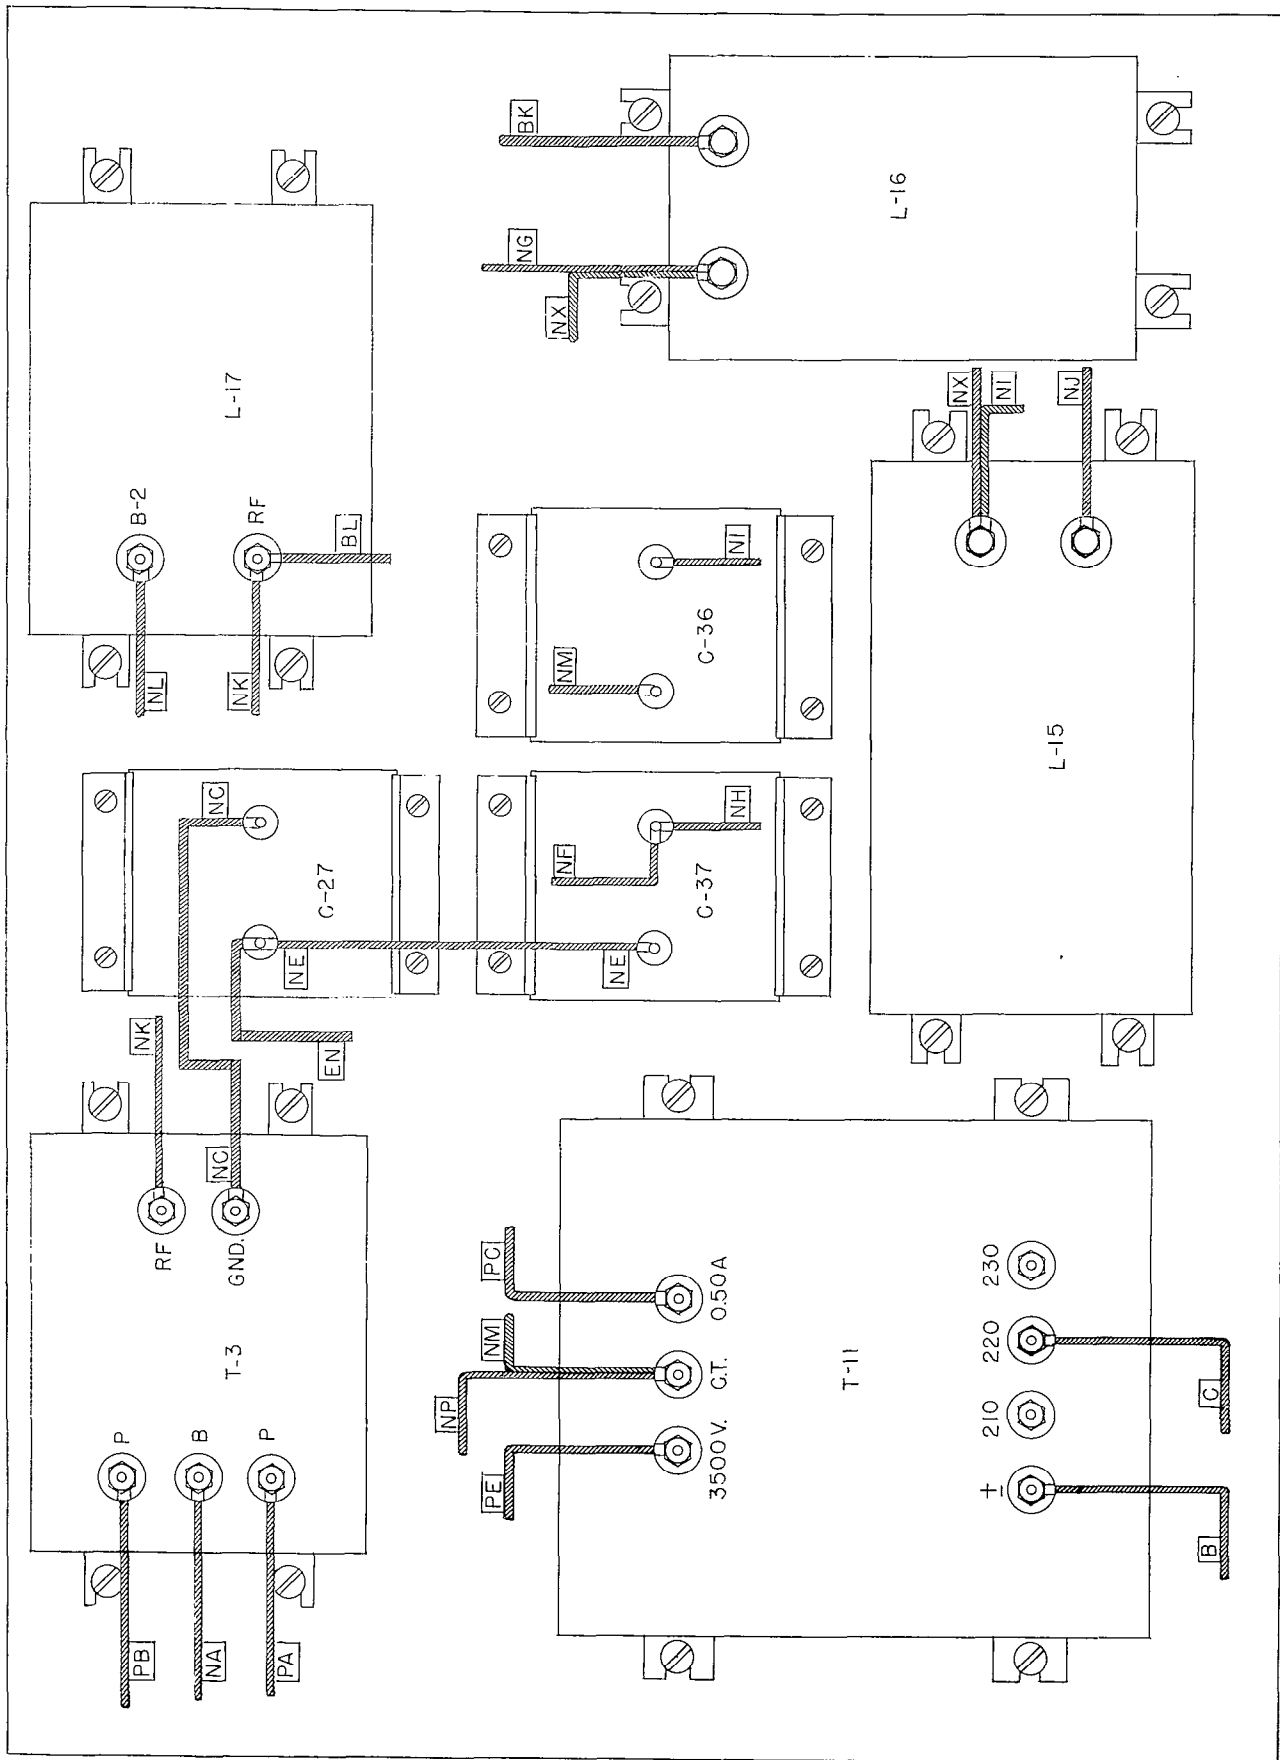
Mounting and Wiring Layout for Lower Components (Outline Drawing)
